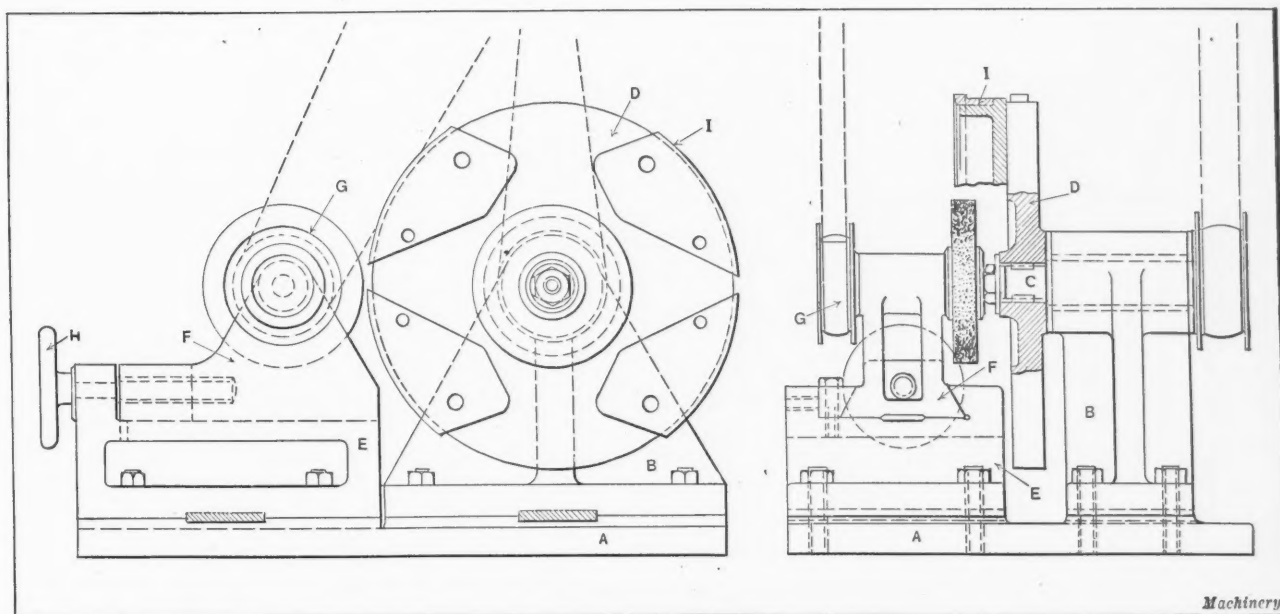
Fixture for grinding Cutting Edges of Upper Die Blades
